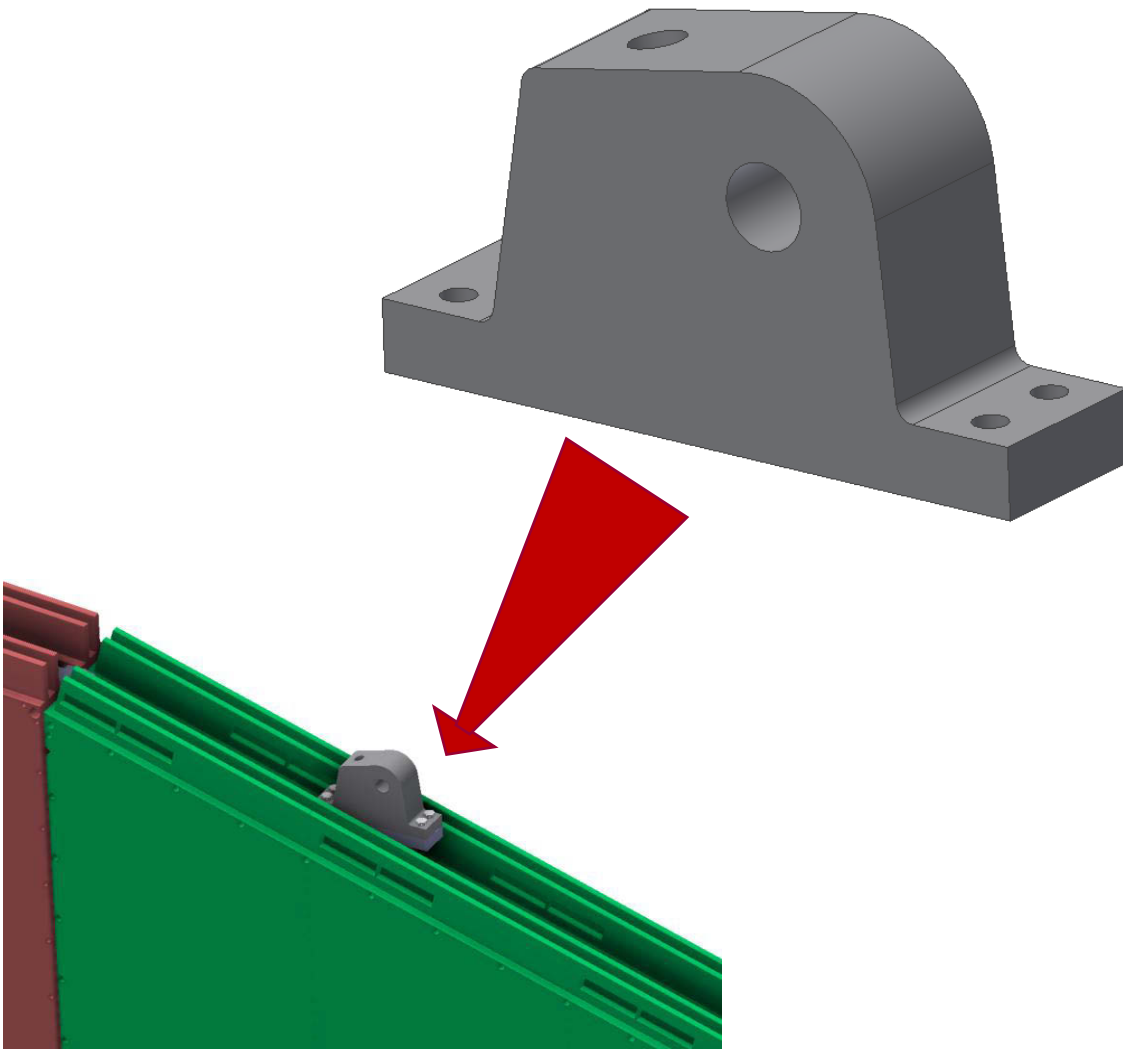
Installed spacer frame mounts (Sinclair & ATLAS, 2015).
